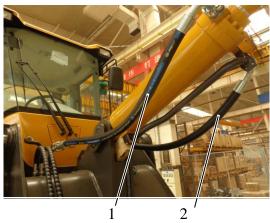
1 Bucket cylinder rod-side rubber hose 2 Bucket cylinder piston-side rubber hose
